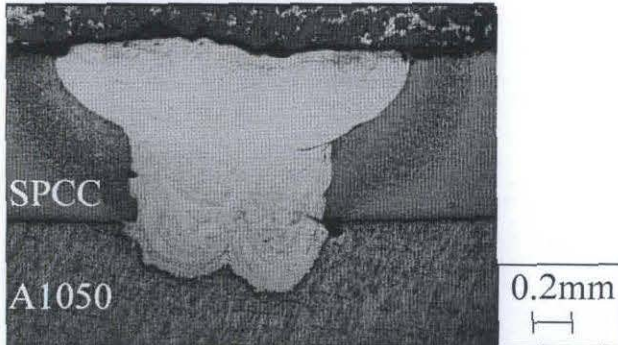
Bead appearance of SPCC/A1050 laser welded joint .(2 pass)
